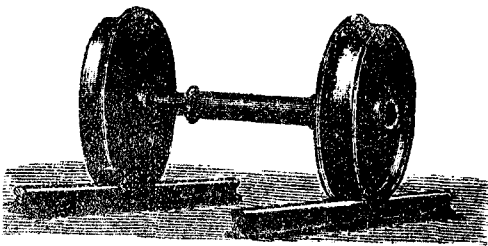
Set of Wheels, with one flange, fixed on  $\bigcirc$  axle, turned for inside bearings.
